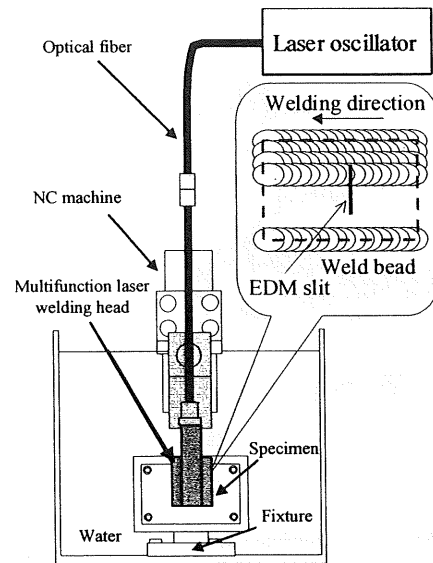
Experimental setup for under water laser welding with multifunction laser welding head
